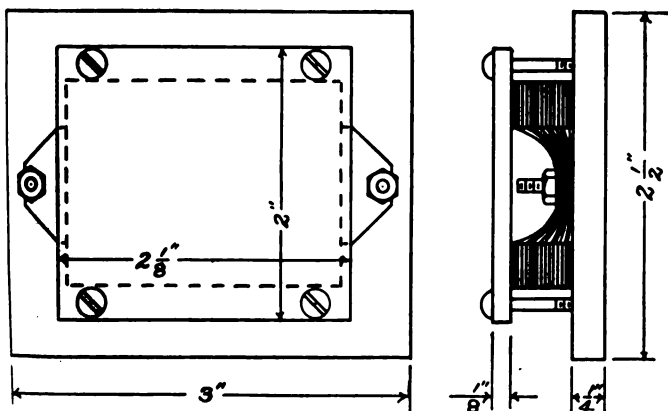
Details of Condenser in Circuit Between Plate and Coupling Tap. Capacity, 0.01 mf., 50 pieces copper foil 1.75 x 1.25 in. between 51 pieces 5 mil ruby mica 2 x 1.5 in.
